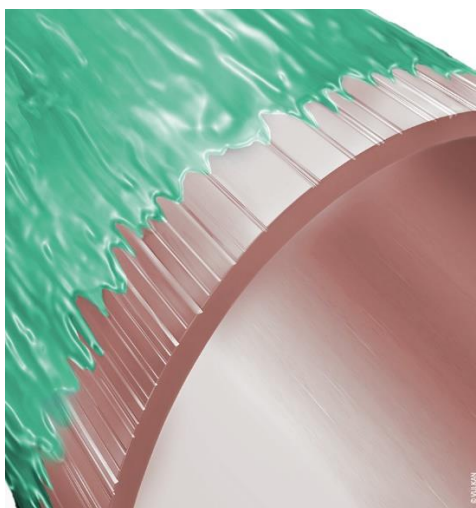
Lokprep appearance on a metal tube with grooves (Source: Vulkan)
